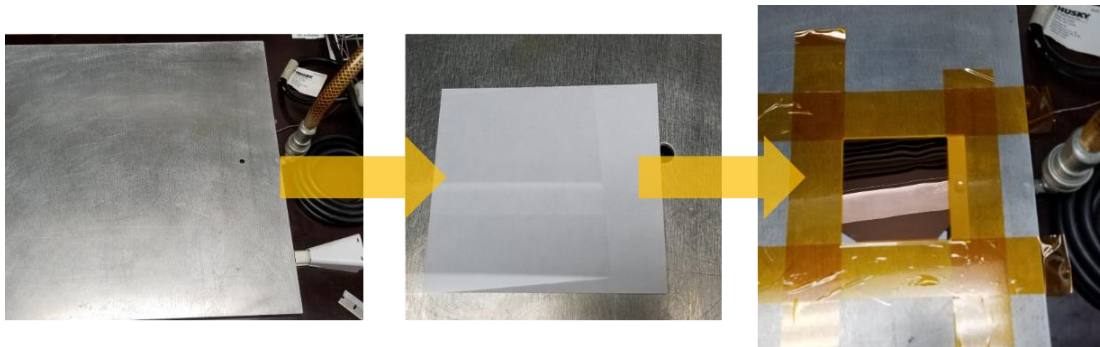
TPV paste fill process showing metal hotplate, bleeder paper and mounted substrate
